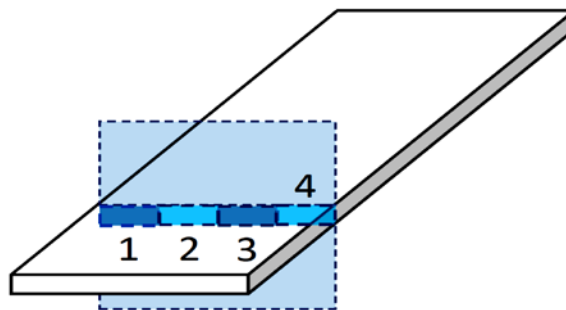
Numbered Cross-Sections of a Trillium™ Brazing Sheet
